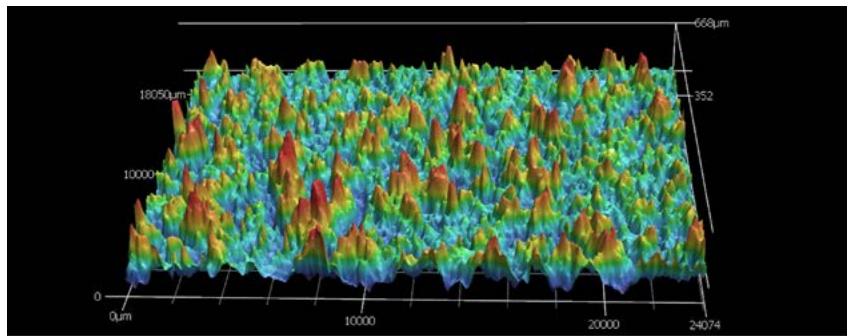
Inner surface of the casting (explosion-proof instrument housing) after removing the coated sand core.
